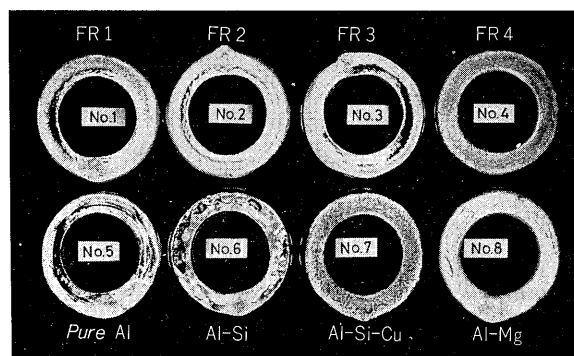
Appearance of crack susceptibility test by ring casting method
